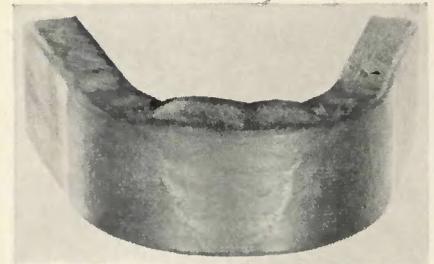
Weld soundness under severe conditions is shown by this defect-free transverse slice from a 1 in. thick gas metal-arc weld after bending 180 deg
